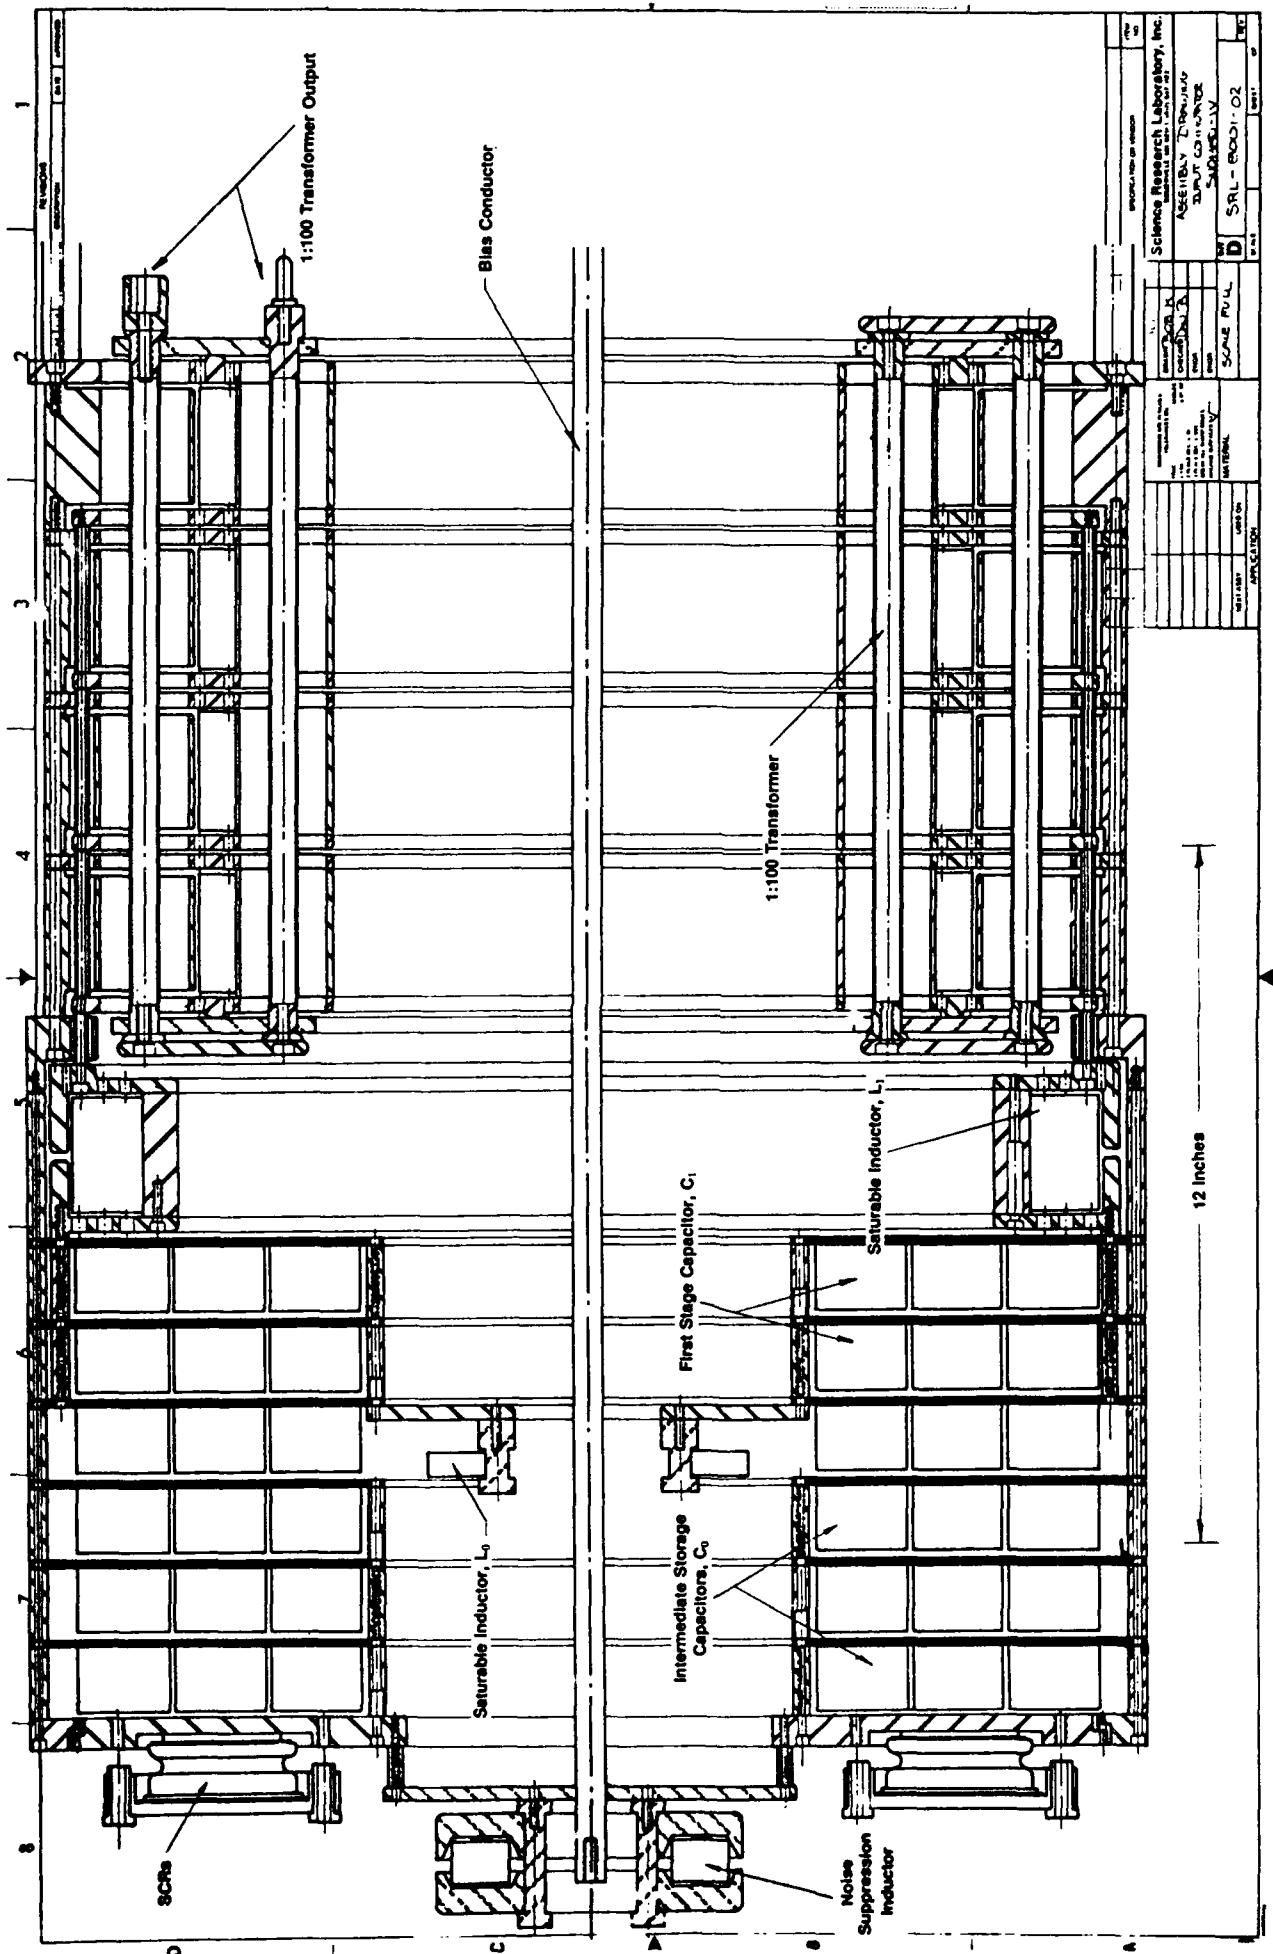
Assembly drawing SNOMAD-IV input commutator arms, first compression stage and step-up transformer.
